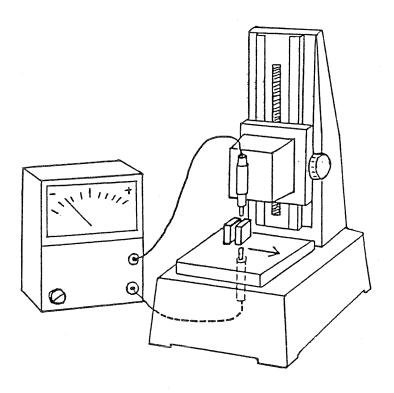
Gauge block comparator using mechanical contact and two displacement transducers
